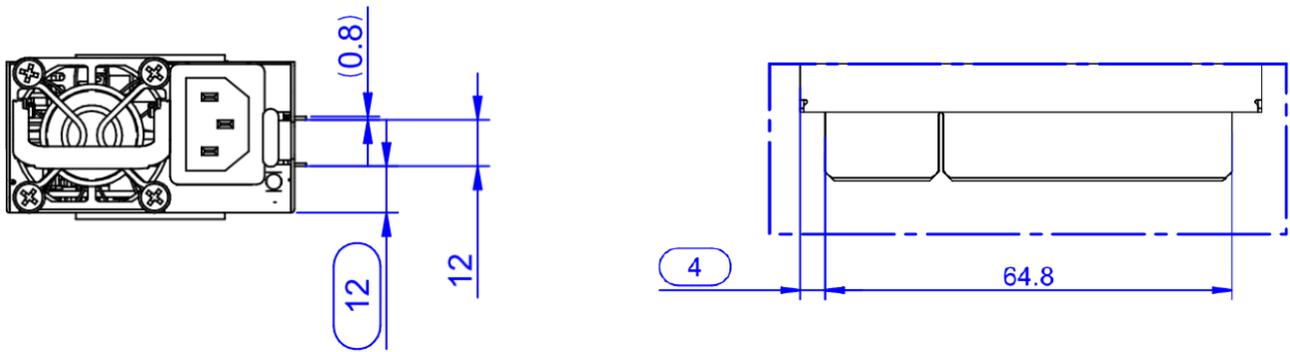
PSU front view (left), detail A of PSU edge connector (right)
